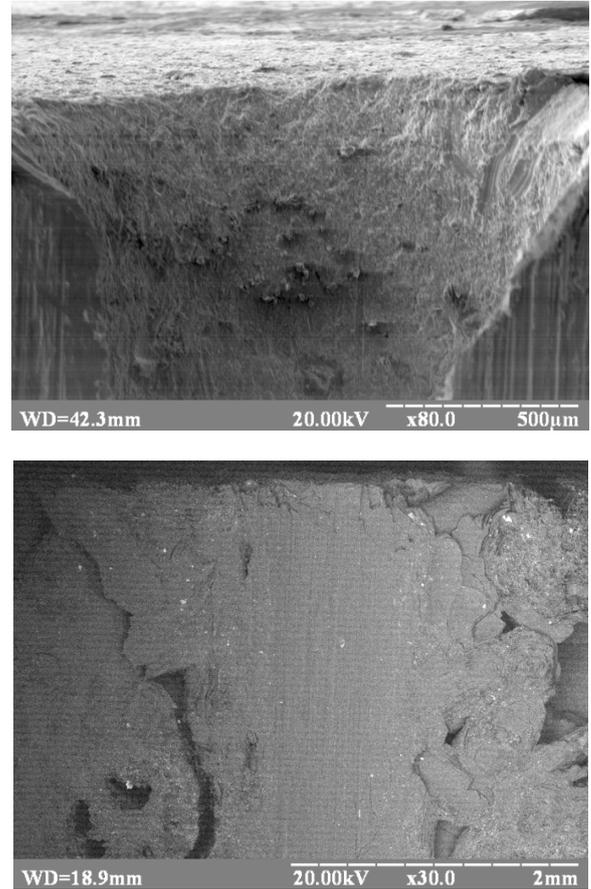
Formation of cutting hole (a) and cracking (b) in samples of composite workpiece
